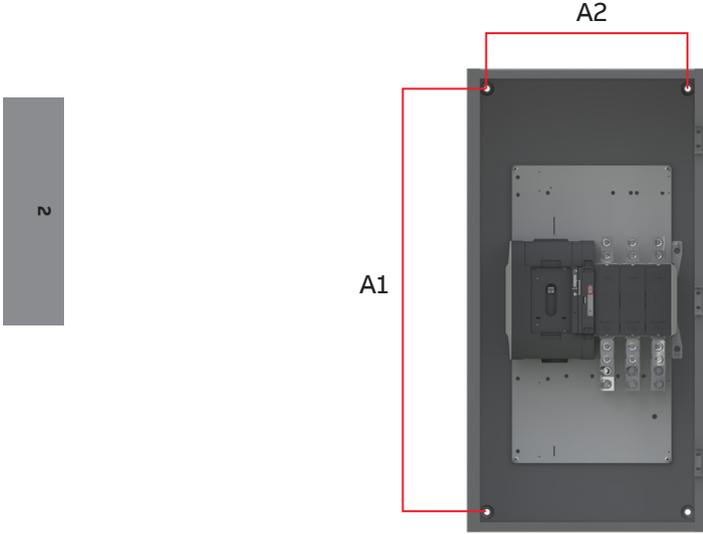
Automatic transfer switches, Mounting hole dimensions, refer to Table 9.2 for A1 and A2 values
